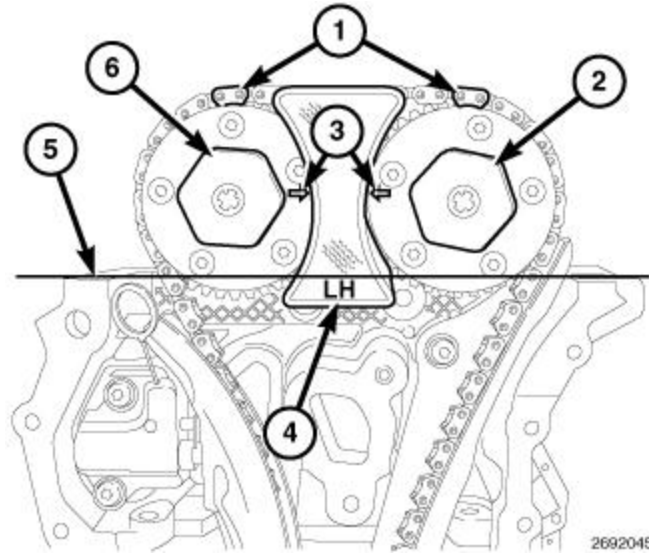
Phaser Timing Marks, Oil Control Valves & LH Camshaft Phaser Lock
